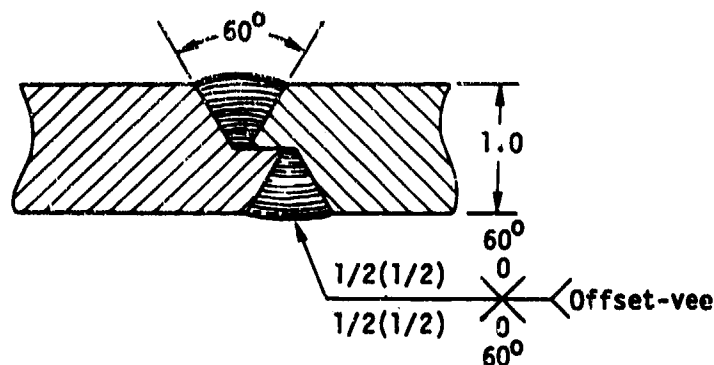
Weld joint design for the offset-vee butt weldments used in ballistic shock tests.
